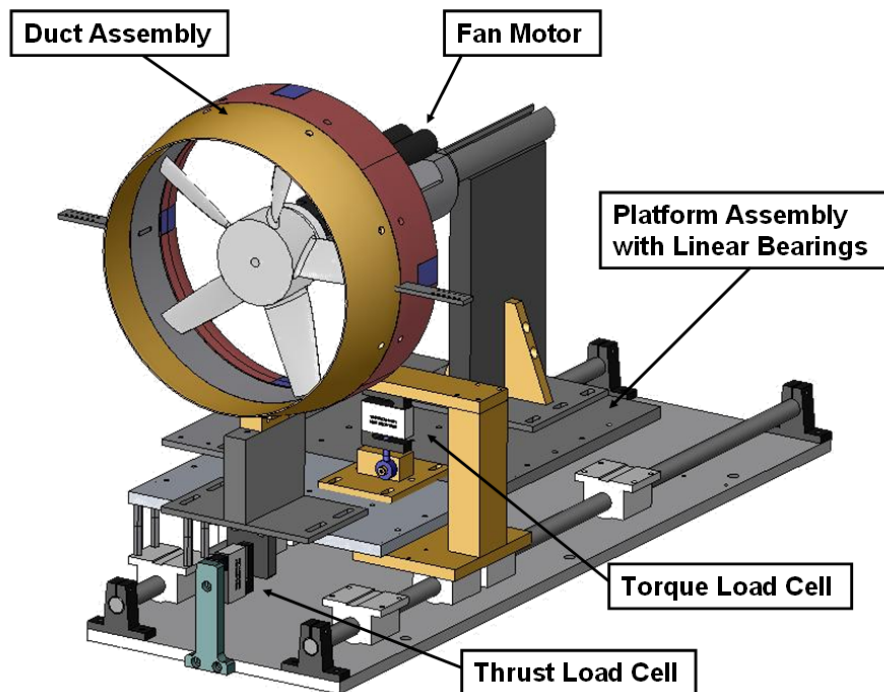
CAD image of static thrust stand with duct assembly and fan.
